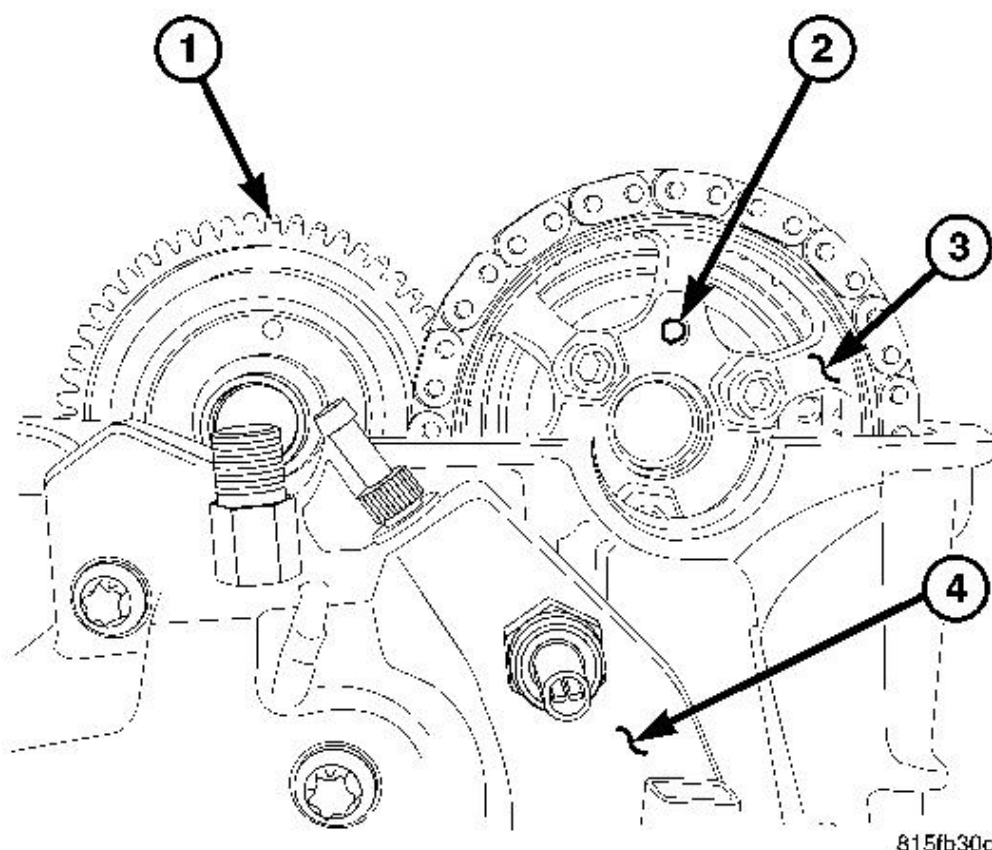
Left Exhaust Camshaft Drive Gear Alignment Dowel
